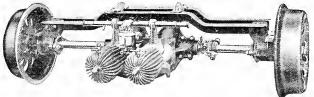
Removable Power Plant of Motor Car No. 32.
